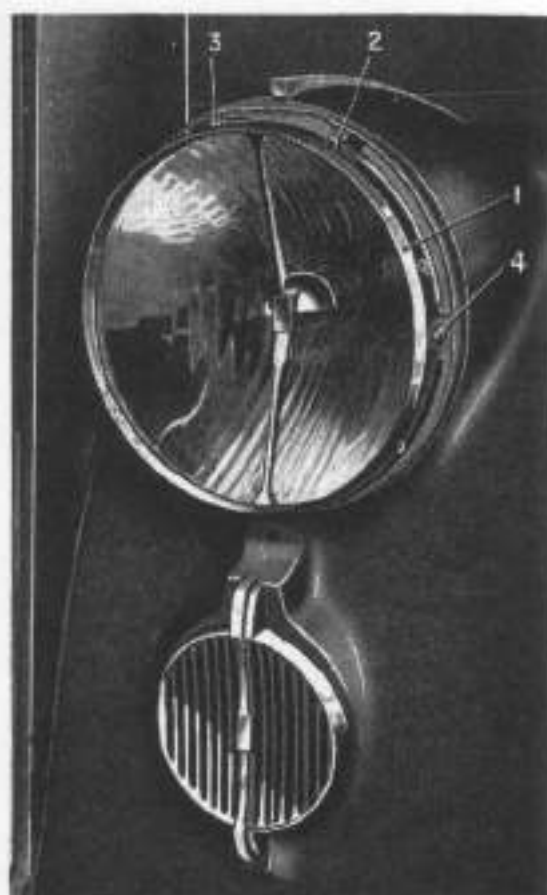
HEADLAMP—WITH RIM REMOVED.
